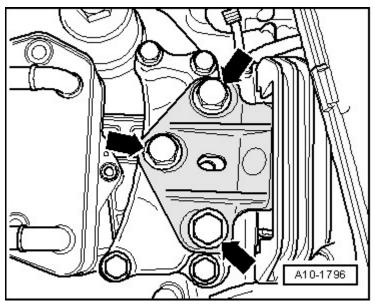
Identifying Engine Mount To Engine Mount Bracket Bolts Courtesy of AUDI OF AMERICA, LLC
